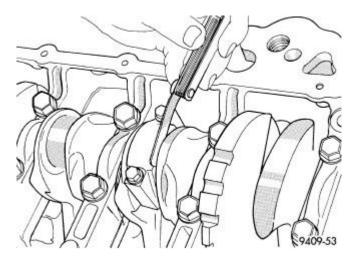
Checking Connecting Rod Side Clearance Using Feeler Gauge Courtesy of CHRYSLER GROUP, LLC
